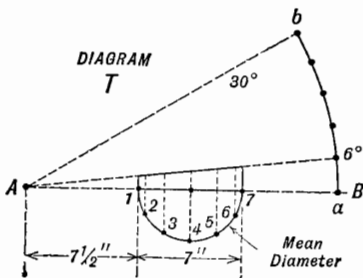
Developing Elbow Patterns from Reduced Drawings
